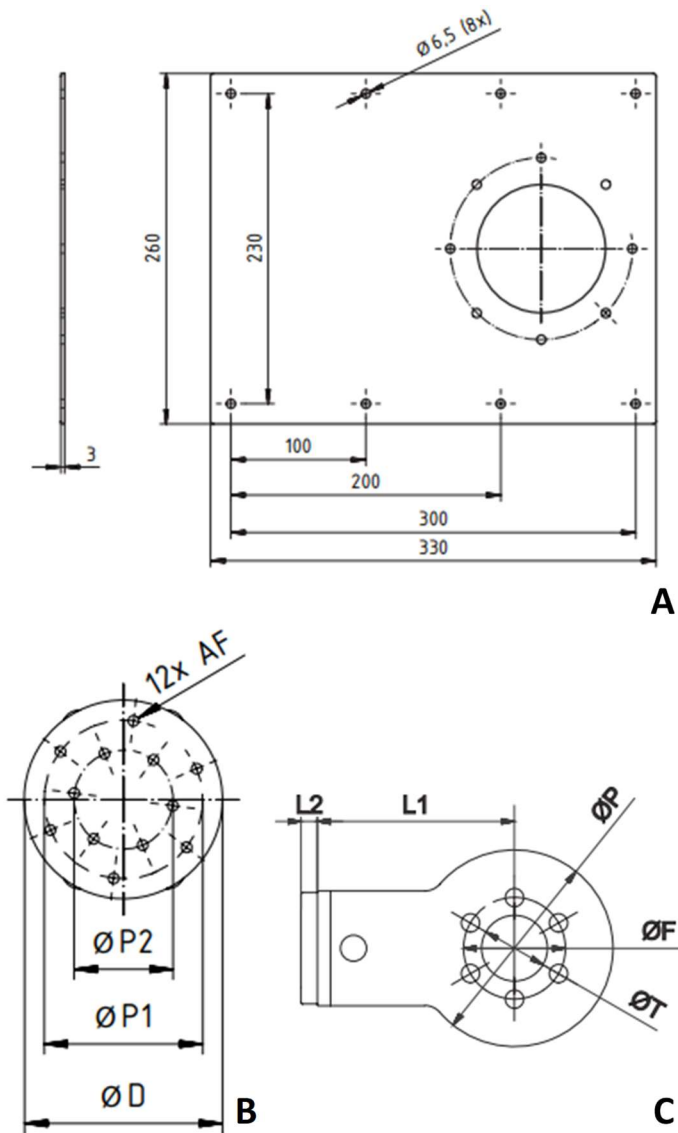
igus® robolink® DP of: A) Robot base; B) hole pattern flange of the 5<sup>th</sup> axis (five axes version); C) Gripper adapter (four axes version). Dimensions are depicted in mm.
